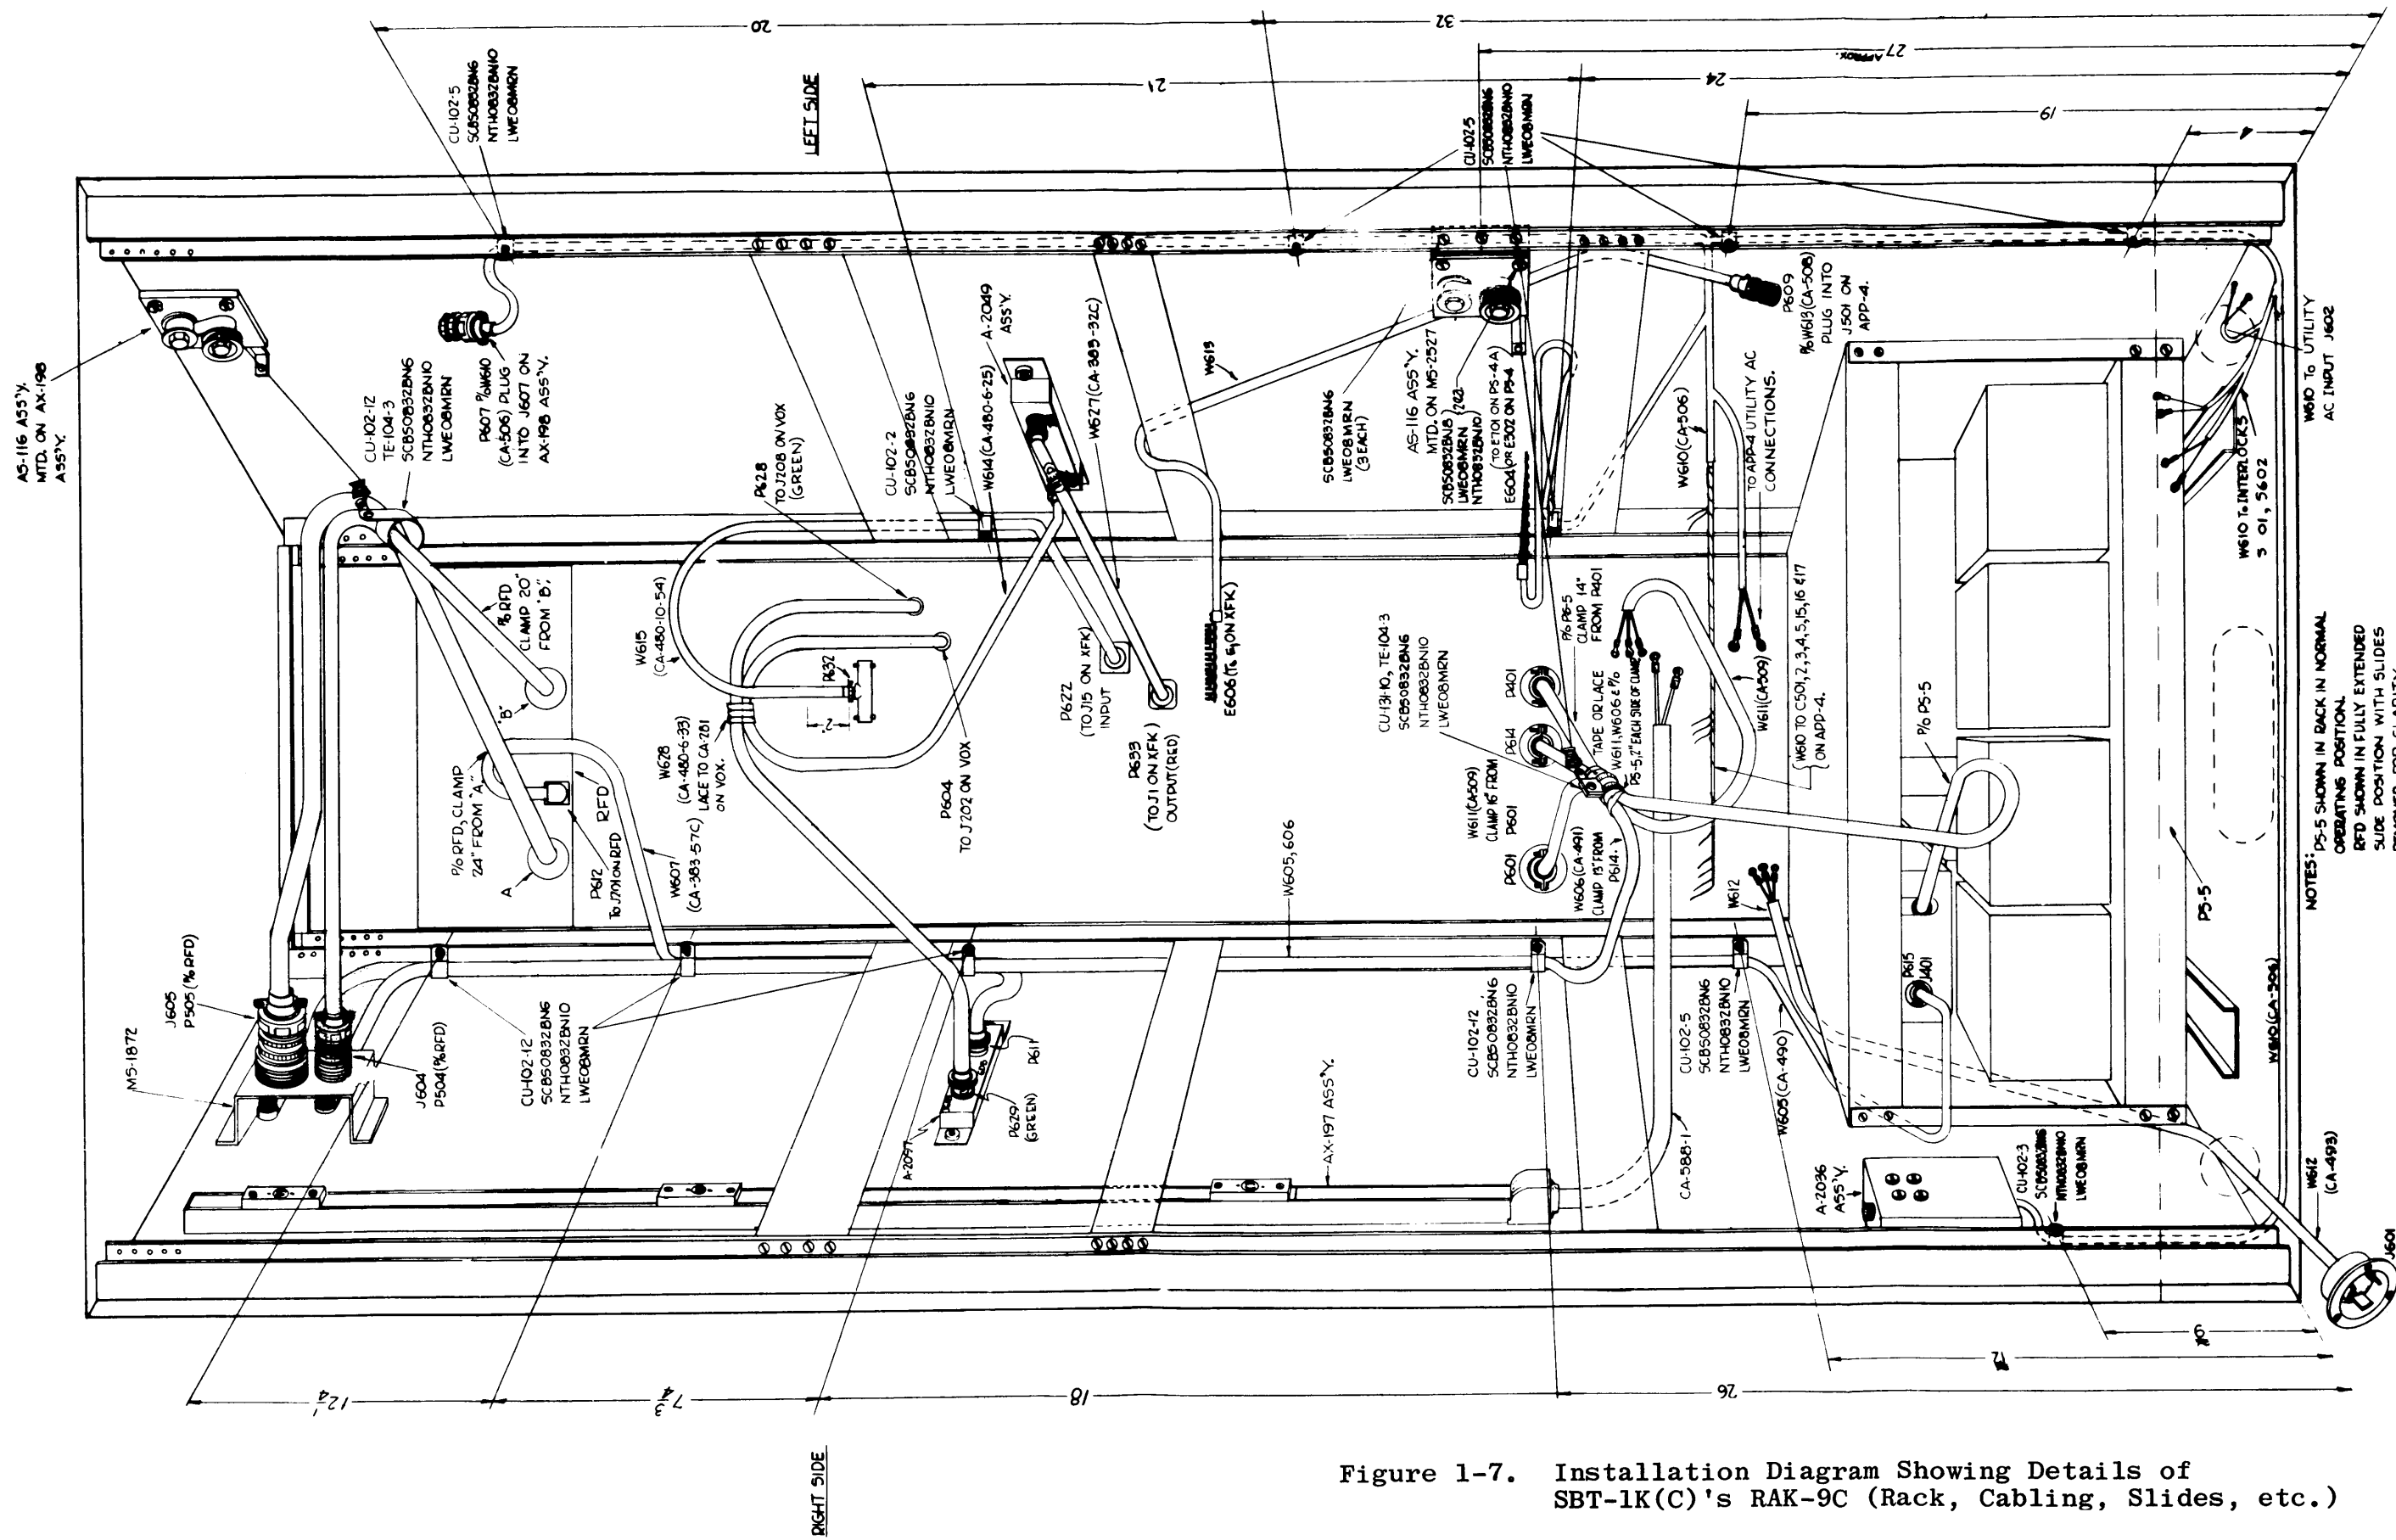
Installation Diagram Showing Details of SBT-1K(C)'s RAK-9C (Rack, Cabling, Slides, etc.)
